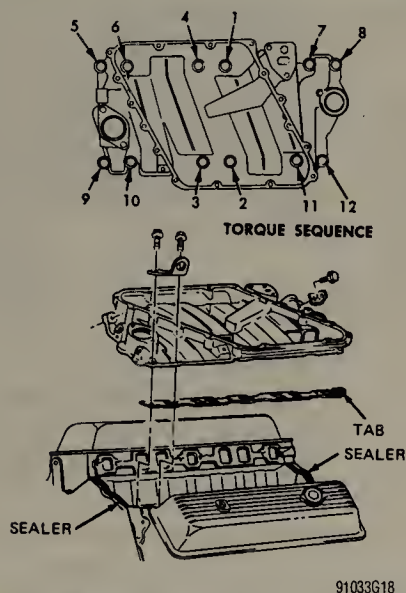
Exploded view of the intake manifold and gaskets, and bolt tightening sequence—1984 5.7L (VIN 8) engine
